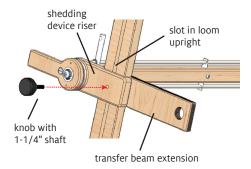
ATTACH TRANSFER BEAM EXTENSION ON HANDLE SIDE
